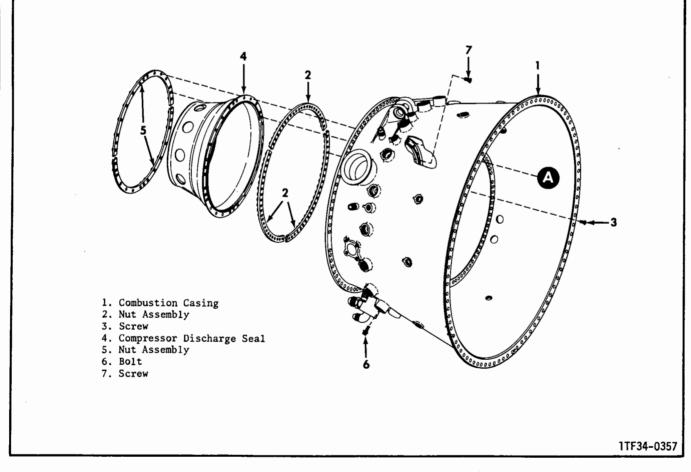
Assembly of Combustion Chamber Module (Sheet 1 of 4)
